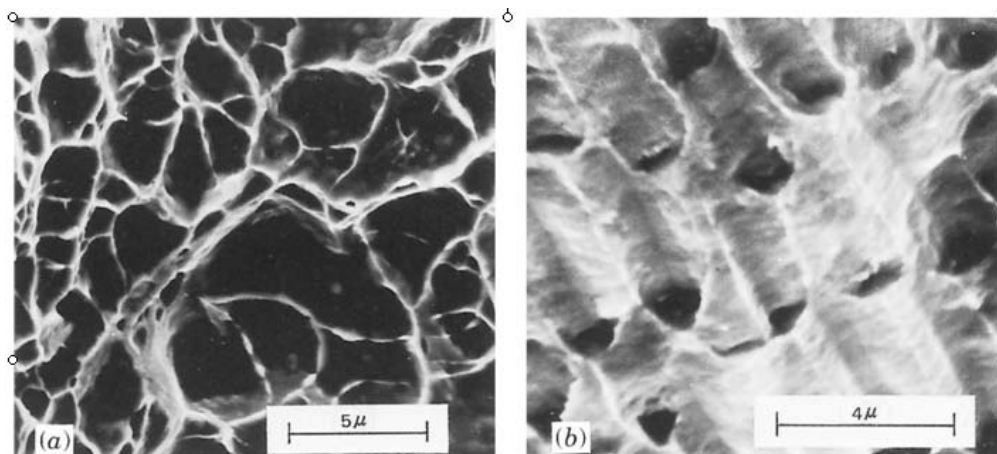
(a) Equiaxed and (b) Shear Dimples
